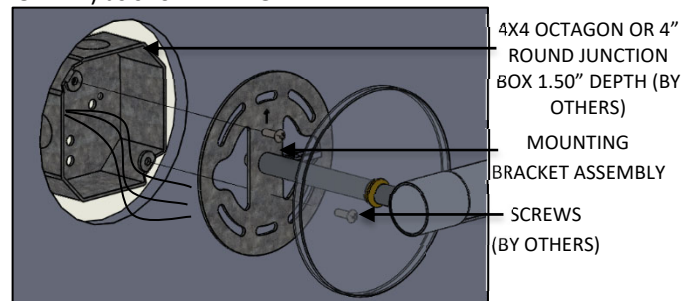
MOUNTING BRACKET ASSEMBLY INSTALLATION
